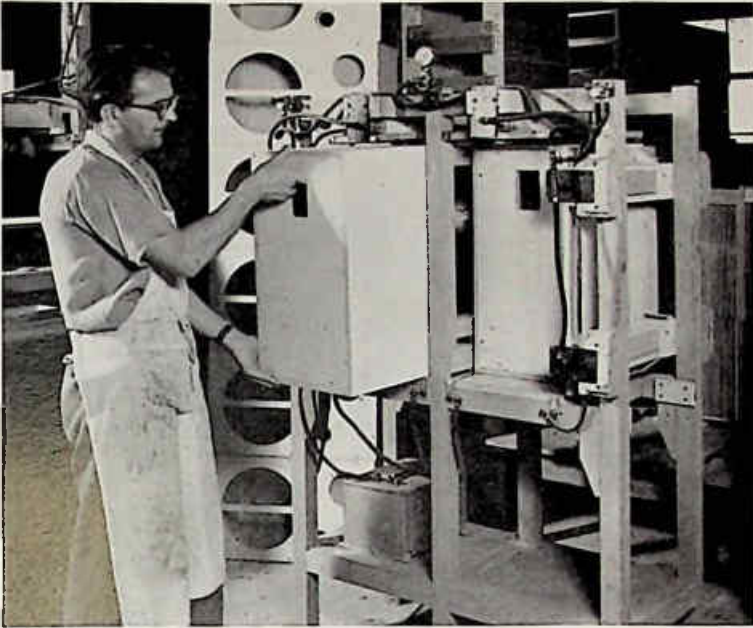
/8. Assembly jig using pneumatic clamps, and low voltage heating to cure the resin adhesive in the joints. Setting time with resin glue and powder hardener (mixed application) is only three minutes.
